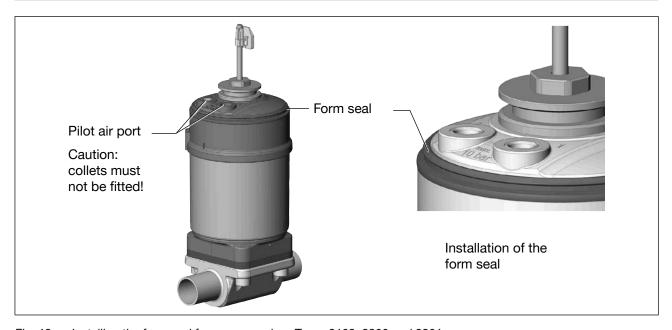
Installing the form seal for process valves Types 2103, 2300 and 2301
